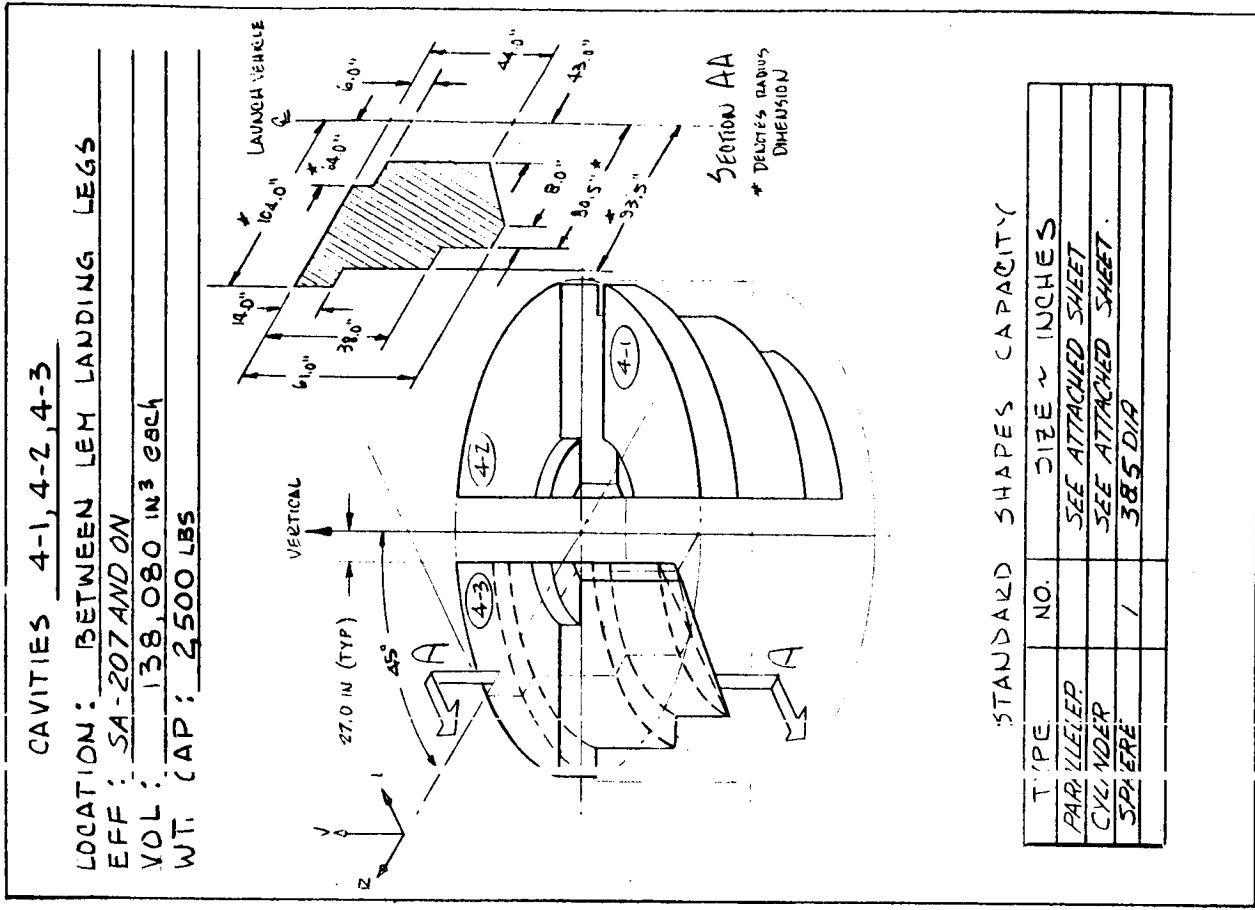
DESCRIPTIVE DRAWING - CAVITIES 4-1, 4-2, & 4-3
